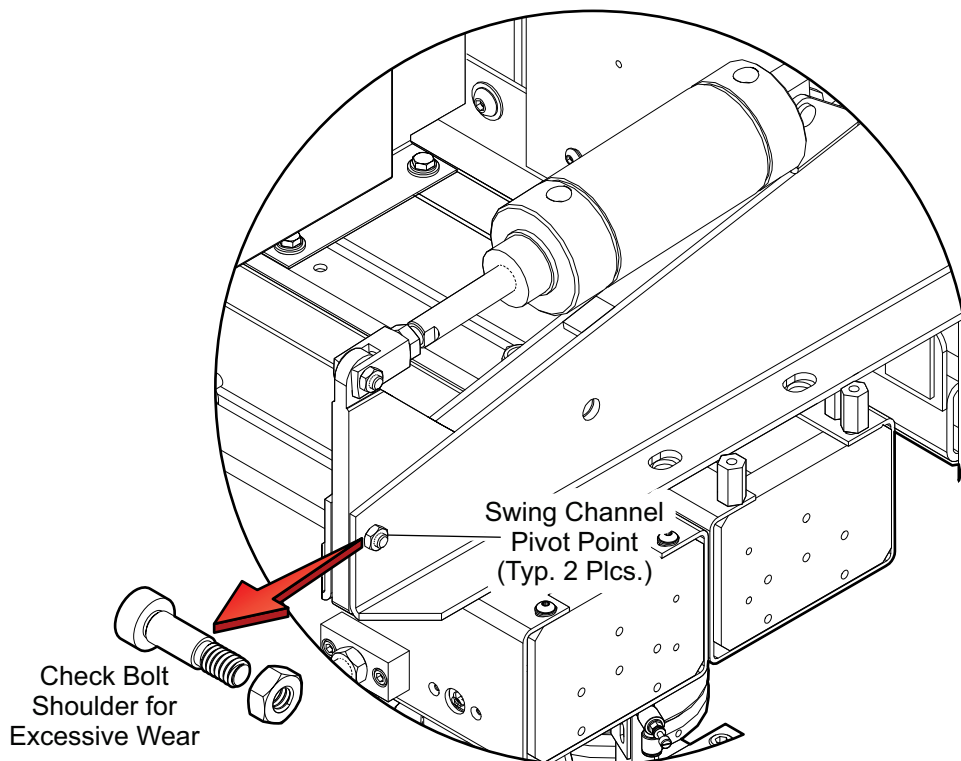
Swing Channel Pivot Point Shoulder Bolts
